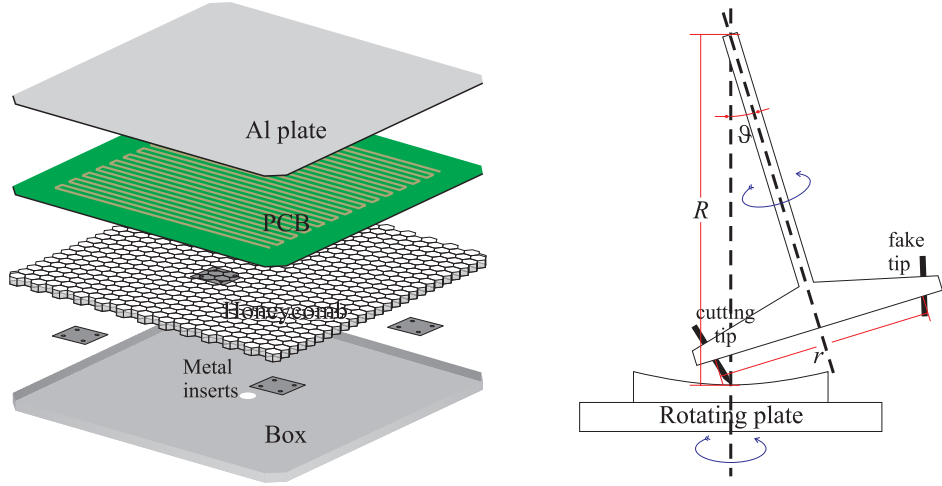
Exploded view of the *raw-blank* structure (*left*). Sketch of the milling tool and the rotating table (*right*).
